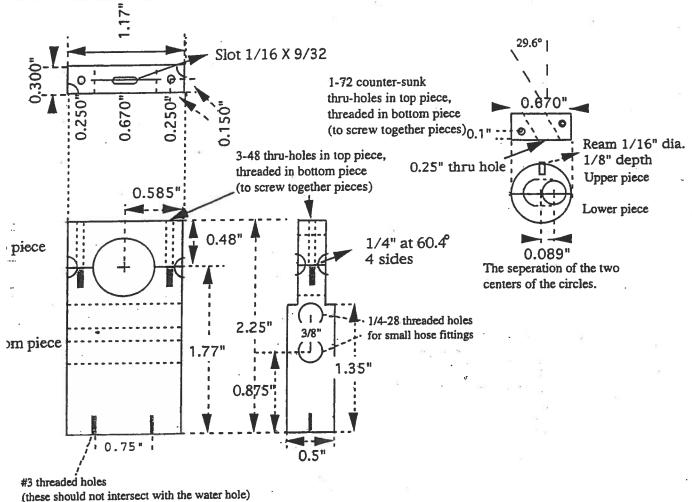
A: Ti:sapphire crystal holder and stand. Holder is a small copper disk (this design is for a 1/4" diameter rod), while stand is made of aluminum. Each consists of a top and bottom piece.
